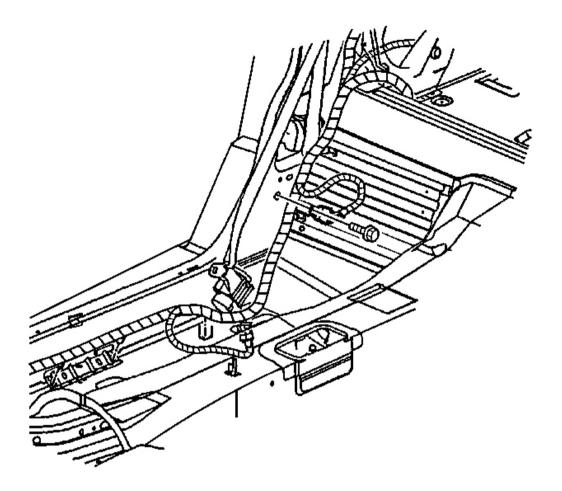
Power Antenna Coaxial Extension Cable At Front Body Wiring Harness Courtesy of GENERAL MOTORS CORP.
